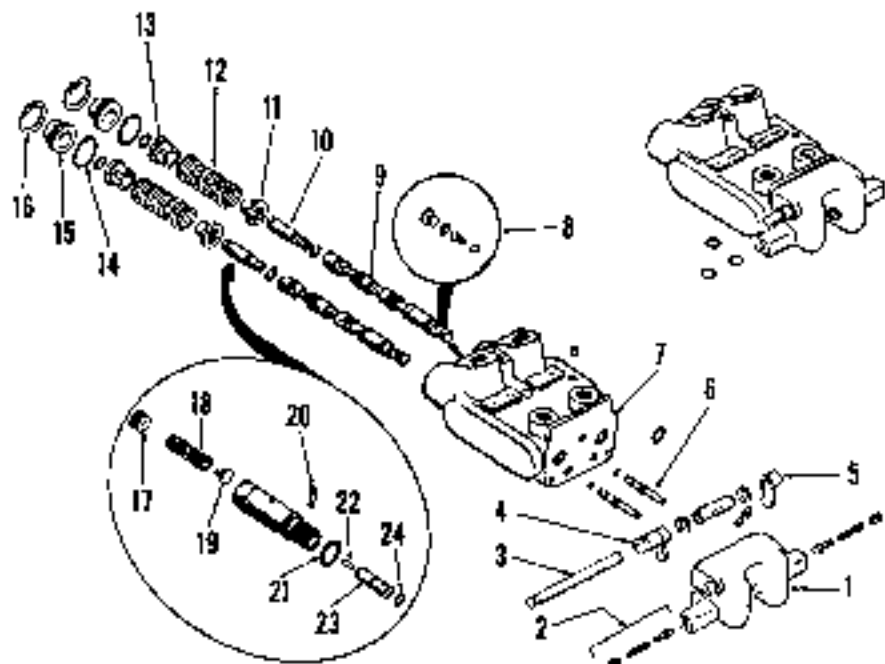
Exploded view of dual spool auxiliary valve assembly used on some models
